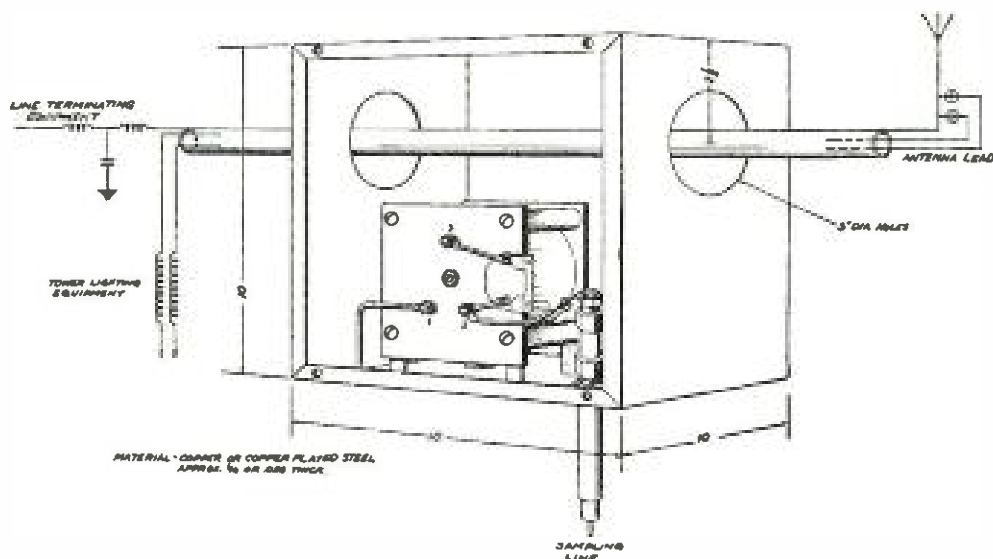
Suggestion for housing the sampling coil, showing the position for maximum coupling.
